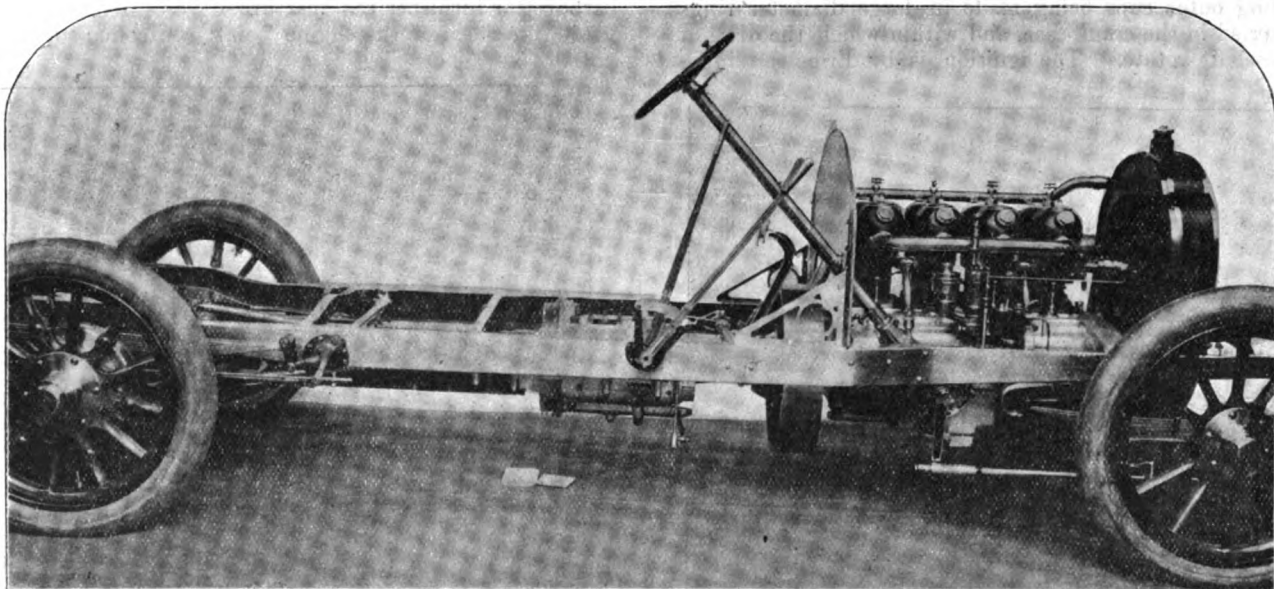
Chassis of the Niclausse 30-40-h.p. Car.
